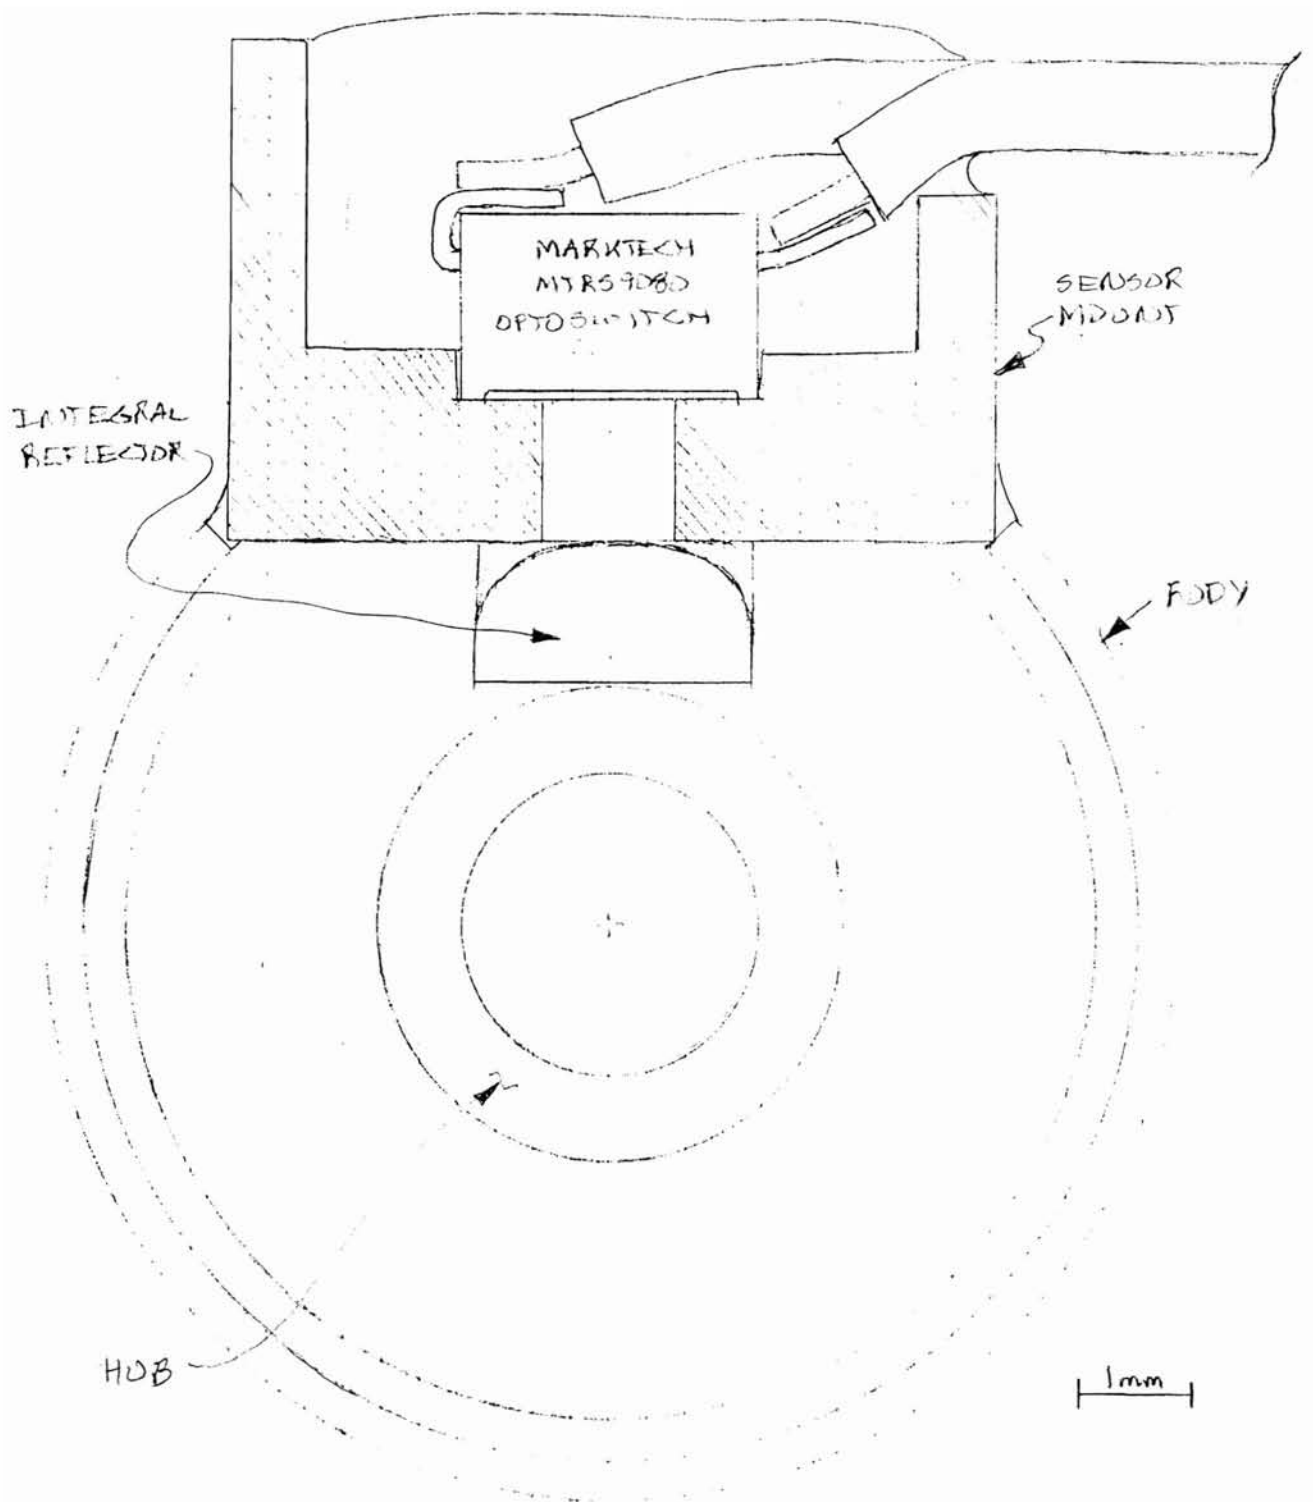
Frontal view of optical angle sensor. (Dwg. GC230791-02)
